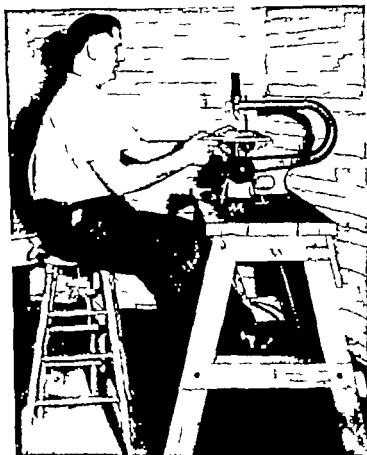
JIG-SAW FOR EXERCISING THE LOWER LIMB
